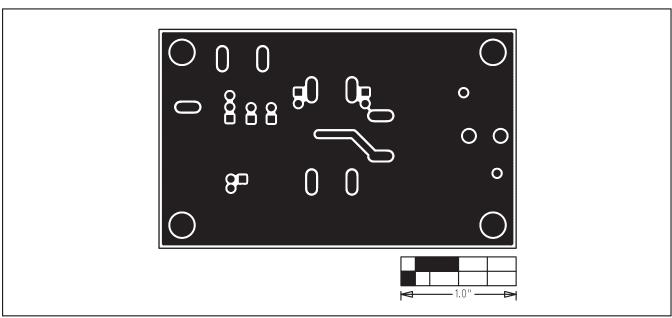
MAX4993 EV Kit PCB Layout—Solder Side
